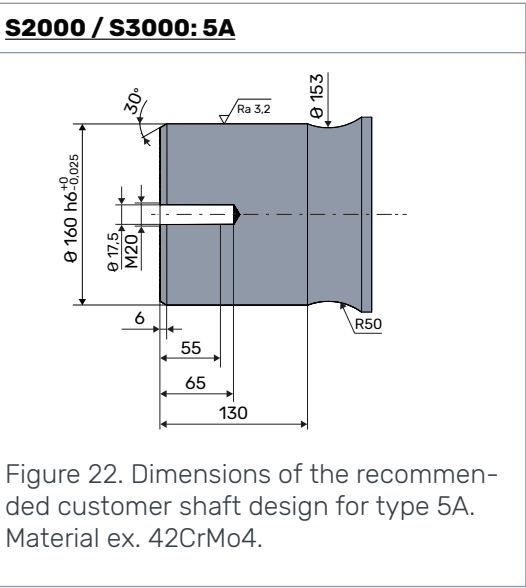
Dimensions of the recommended customer shaft design for type 5A. Material ex. 42CrMo4.
